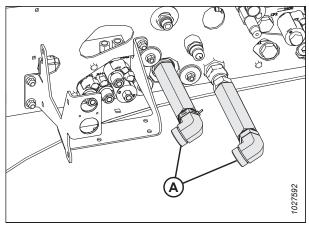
Hard Plumbed Connections – Rotary Disc Ready Windrower
